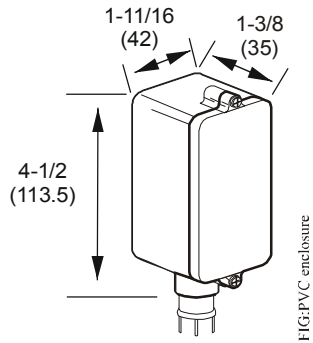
SHL10A-600R and -603R Outdoor Shield Dimensions, in. (mm)
